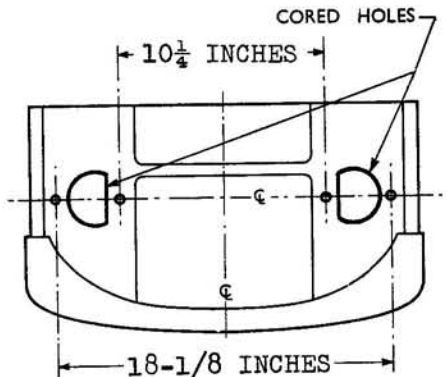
When installing early radiator with late front support or late radiator with early production front support, new mounting holes must be drilled according to above dimensions.
